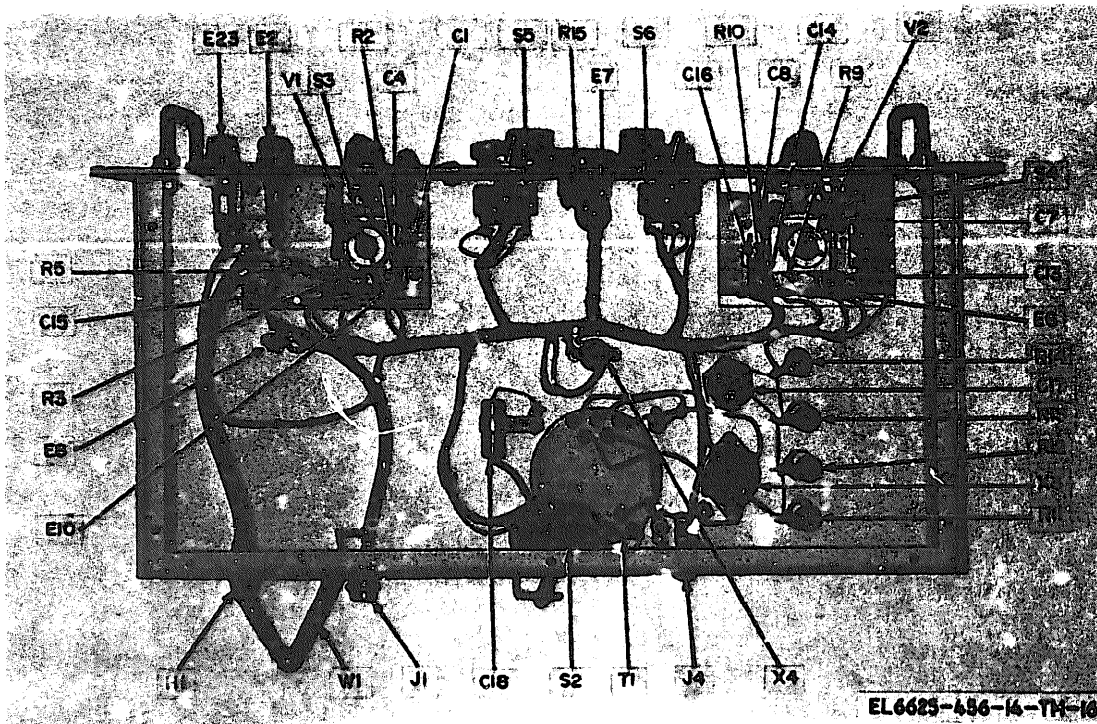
IS-683A/TSM and TS-663B/TSM panel and chassis assembly, cover plate removed, bottom view.
